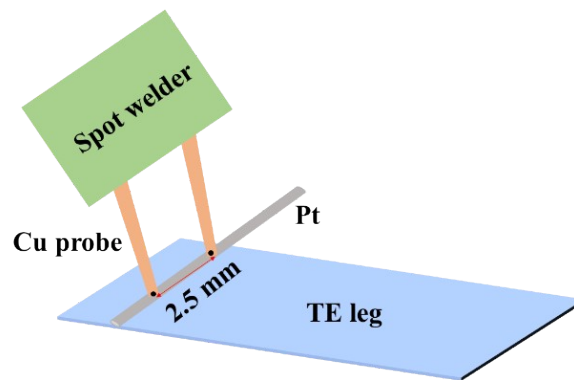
Schematics of the spot-welding method used in this work. The distance between the two Cu probes is about 2.5 mm.
